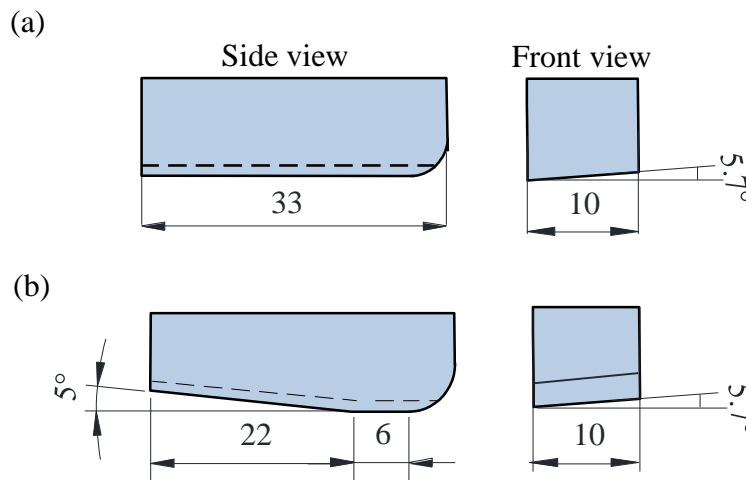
Dimensions of (a) flat and (b) taper bottom inclined punches.
